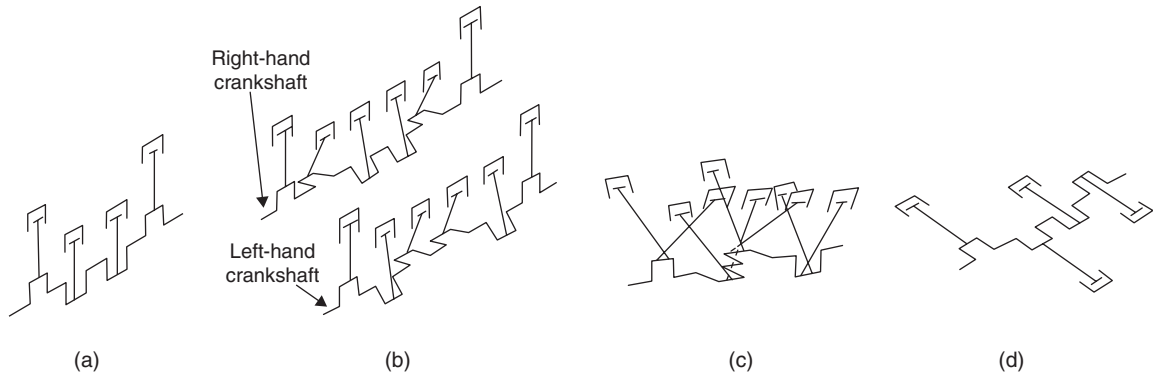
Cylinder and crankthrow arrangements: (a) in-line four-cylinder (b) in-line six-cylinder (c) eight-cylinder (d) horizontally opposed four-cylinder
